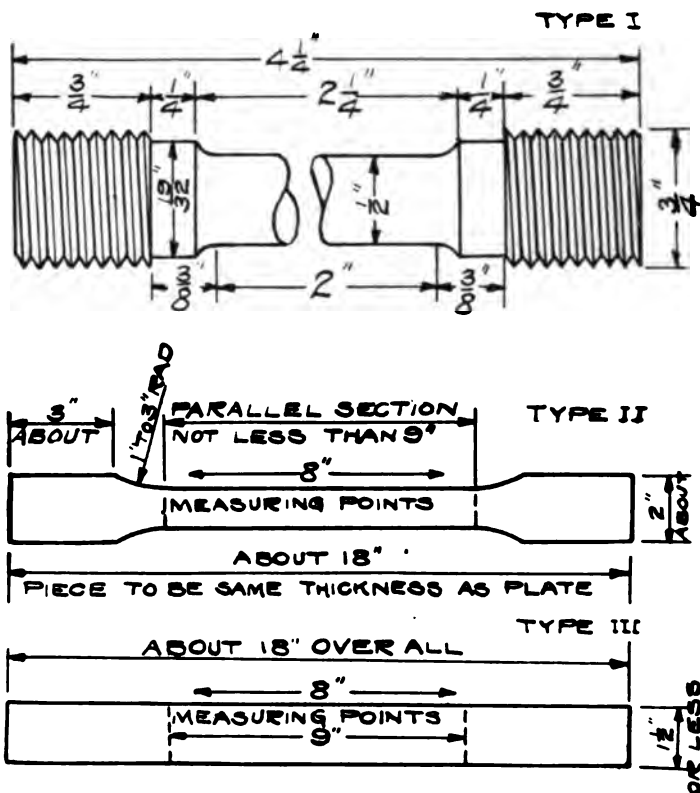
TYPES OF STANDARD TEST PIECES.
